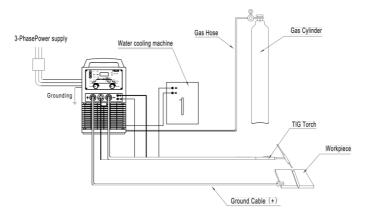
Water-cooling TIG welding(Separate water cooling machine)
